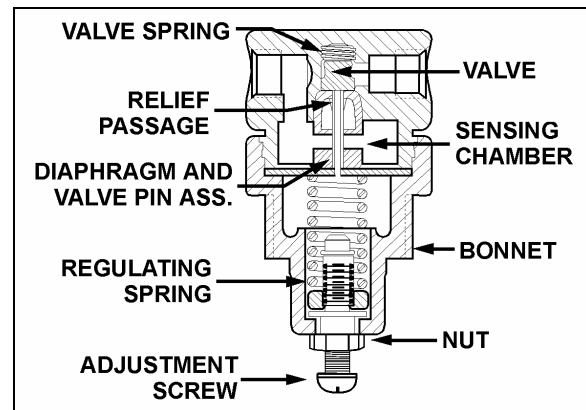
AIR PRESSURE REGULATING VALVE 12141B
